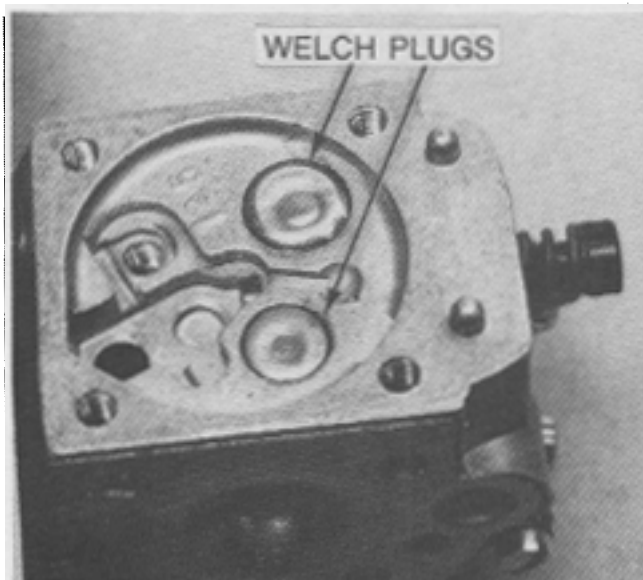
To completely clean this carburetor, it is necessary to remove both welch plugs.
